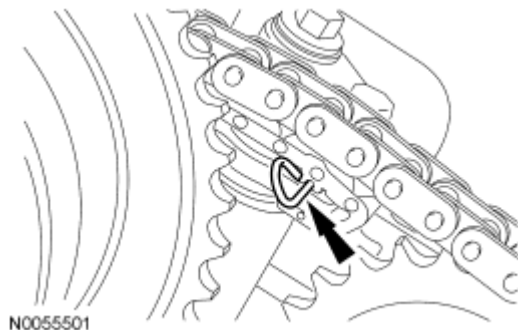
Locating Lock Pin On LH Secondary Timing Chain Tensioner
